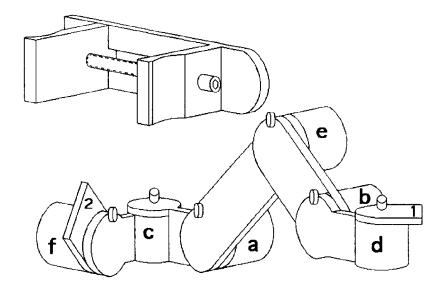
Passive measuring/regulating electro-mechanical devicefor setting a fracture on independent planes (a-f are the angular encoders) and relative extensor
